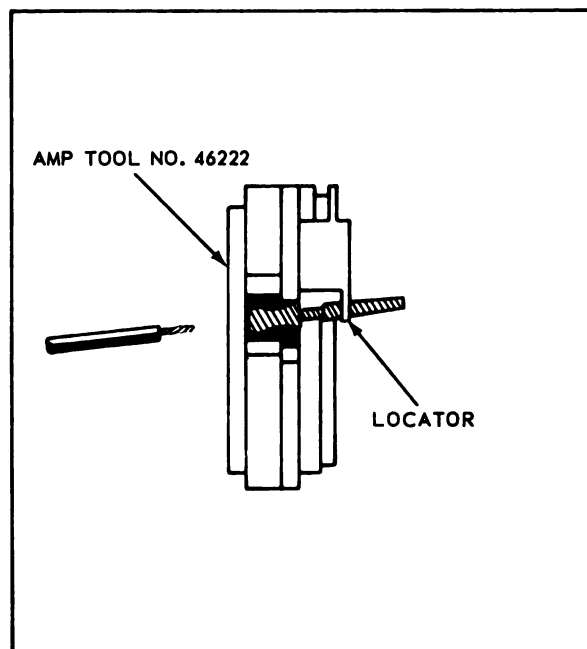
Positioning Taper Pin in AMP Crimping Tool
